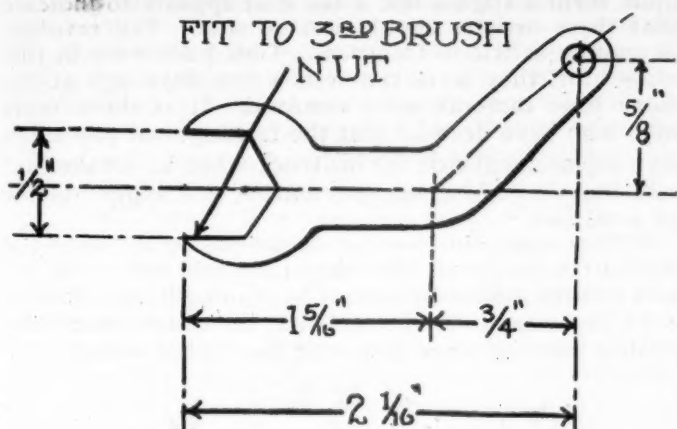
Wrench for operating lock nut on third brush adjustment on Ford generators. On generators having the small nut, use a magneto wrench. The drawing above is done in actual size and can be used as a pattern for making this tool
